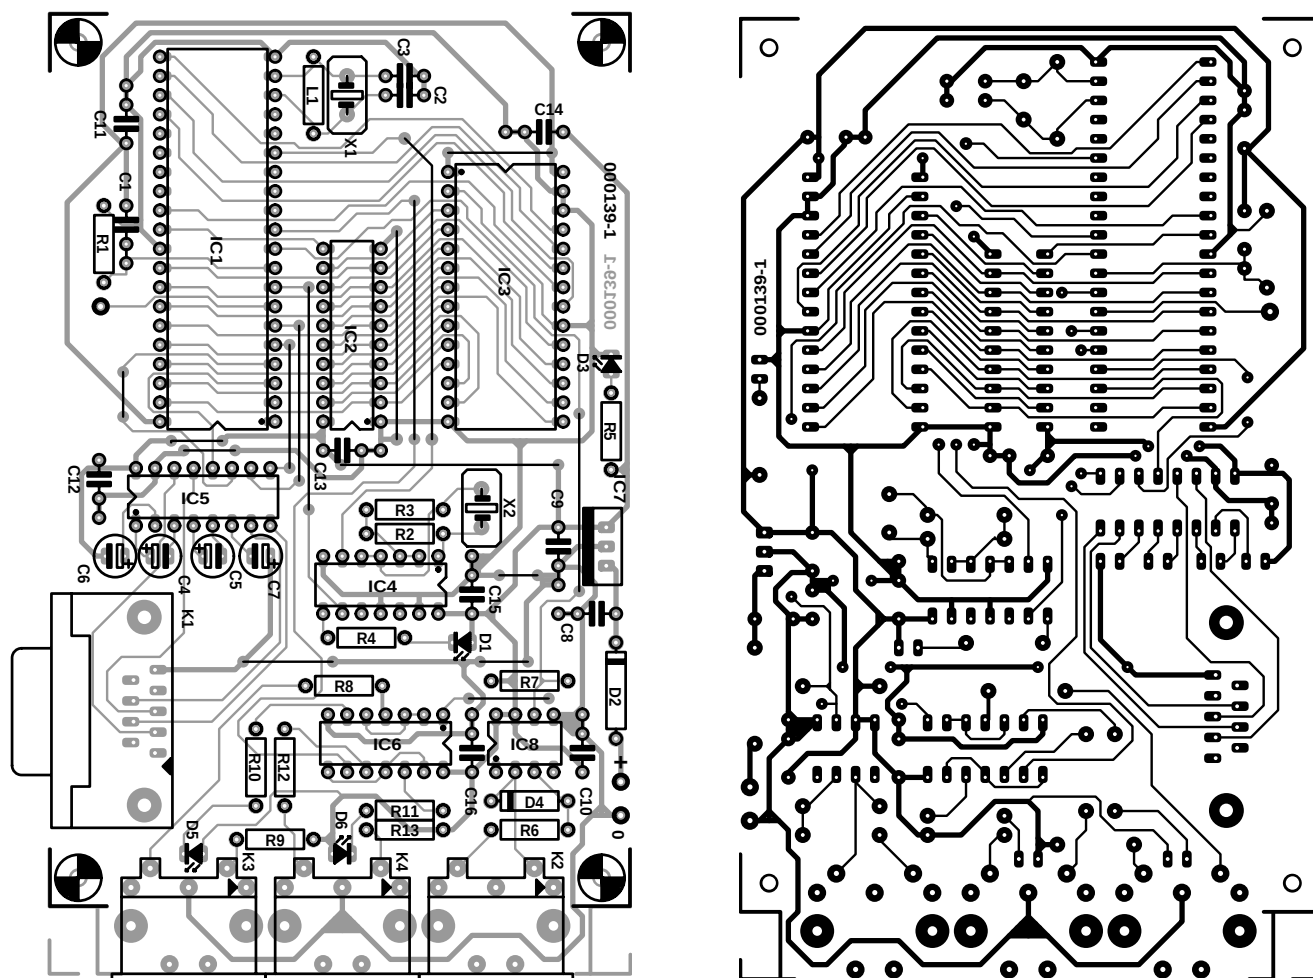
Copper track layout and component mounting plan of the PCB designed for the converter.
